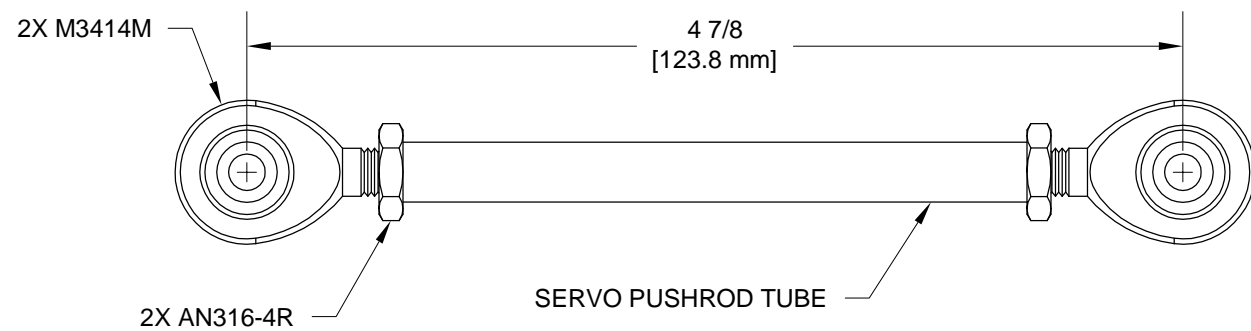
PITCH SERVO PUSHROD ASSEMBLY
